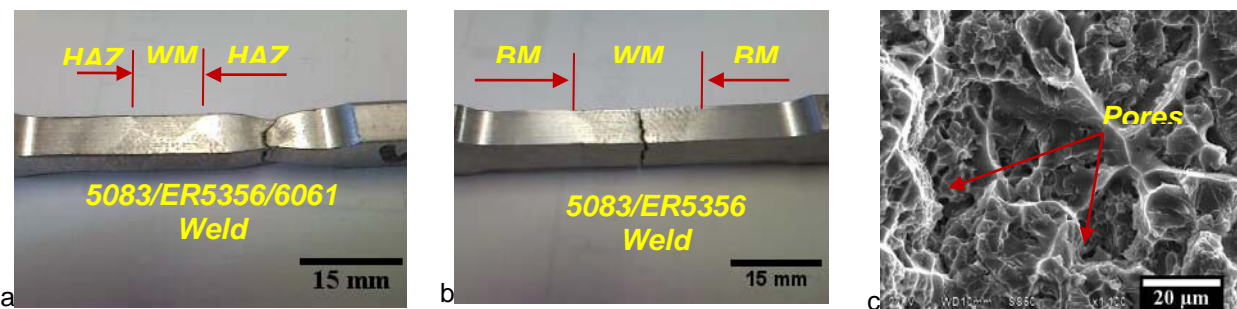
Tensile fracture in a) 6061 HAZ, b) 5083 WM and c) brittle fracture in 5083 WM
